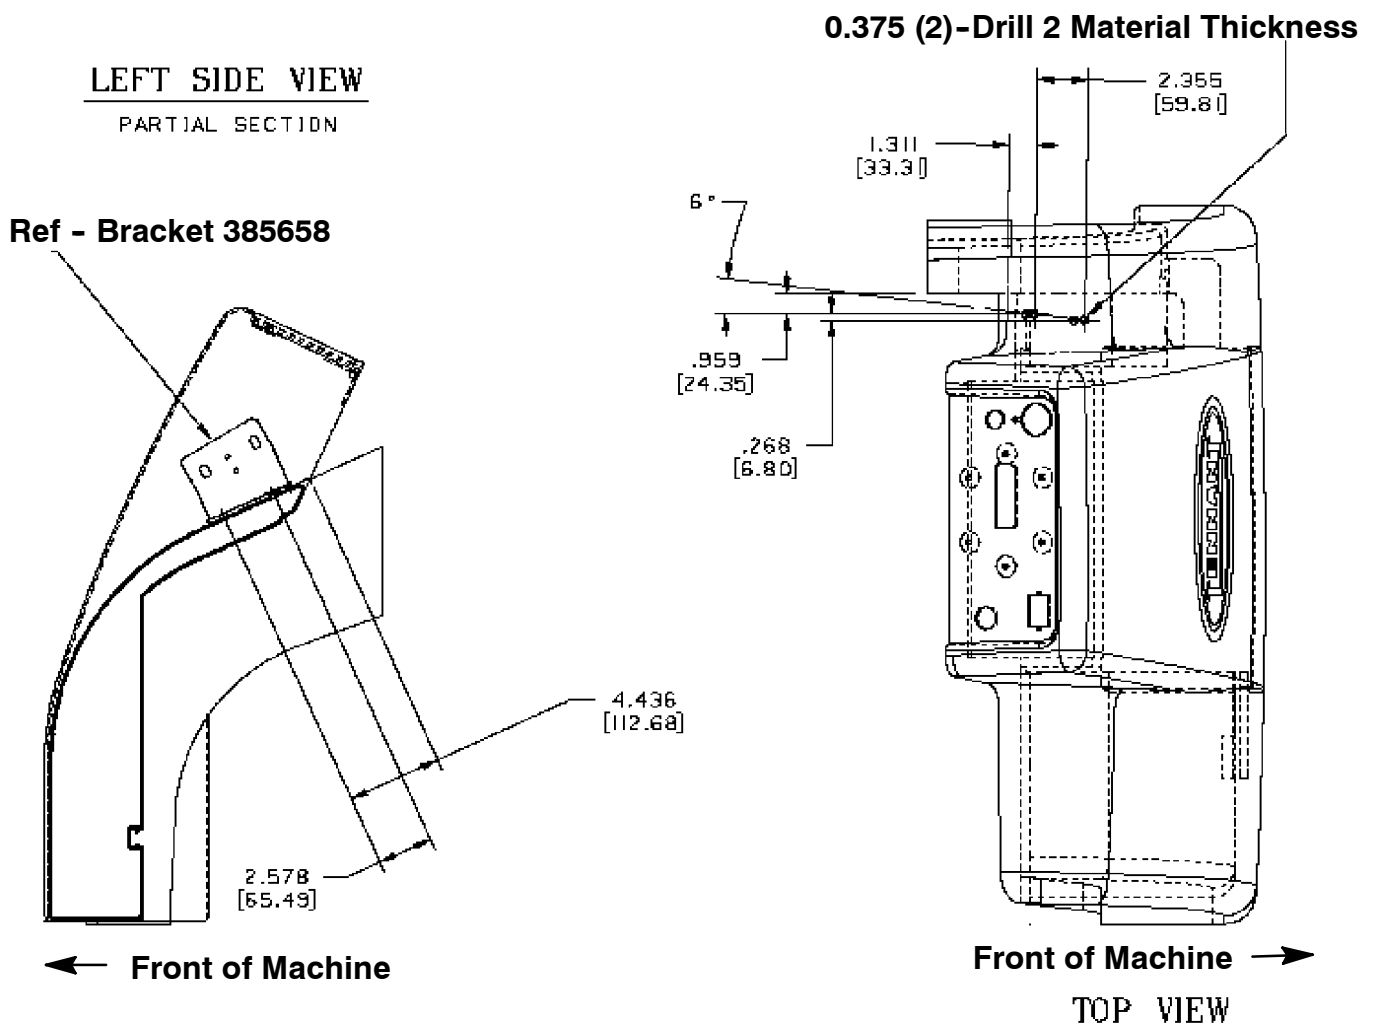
Power Wand Assembly Mounting Hole Dimensions
